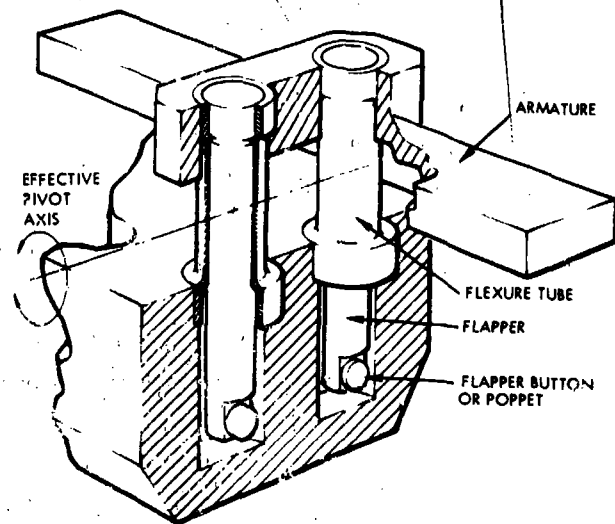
Flexure Tube Mounting of Bipropellant Valve Torque Motor
